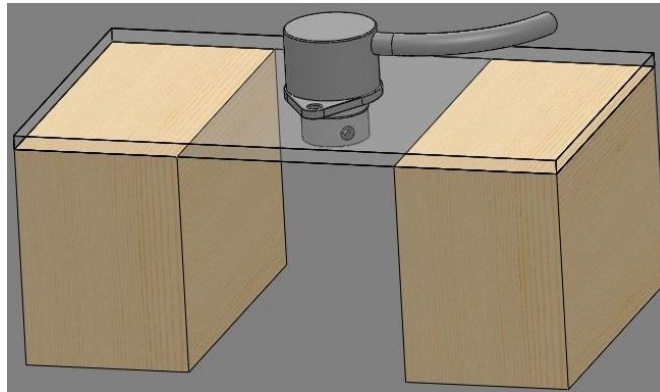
Support for the Encoder. The Bottom Portion of the Encoder is Attached to the Shaft
